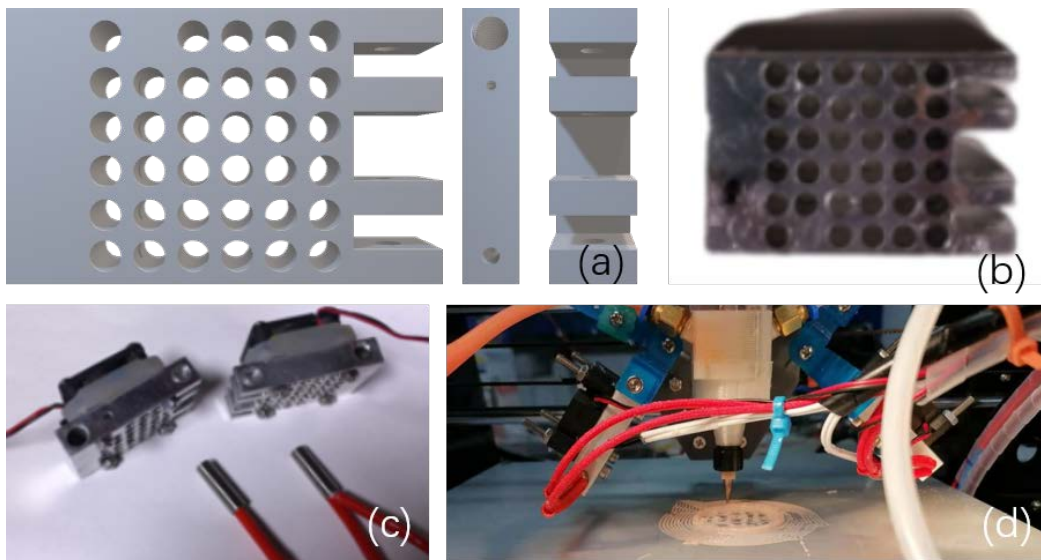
Aluminium heating block: (a) 3D view of heat wing CAD model; (b) manufactured metal heat wing; (c) heating iron connected with metal heat wing; (d) heating module connected with silicone extruder
